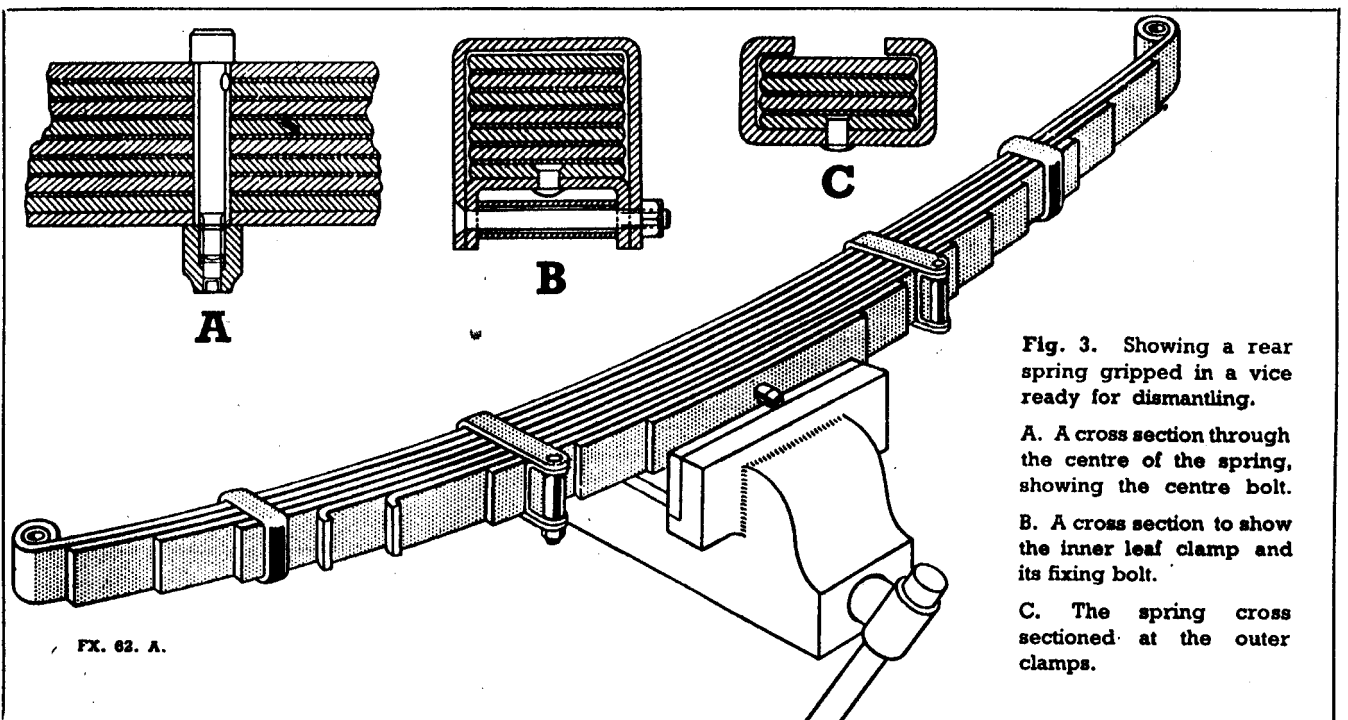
Showing a rear spring gripped in a vice ready for dismantling.
